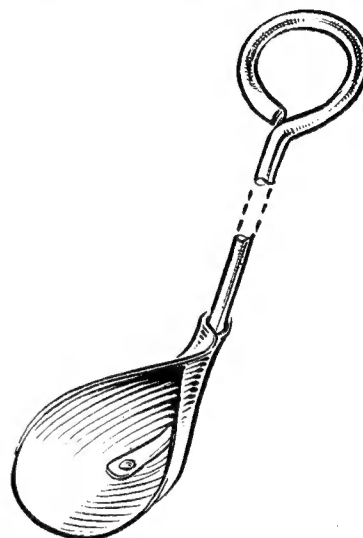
Simple form of "spoon" required for skimming the molten iron. They burn away rapidly, so must needs be cheap and easy to produce
